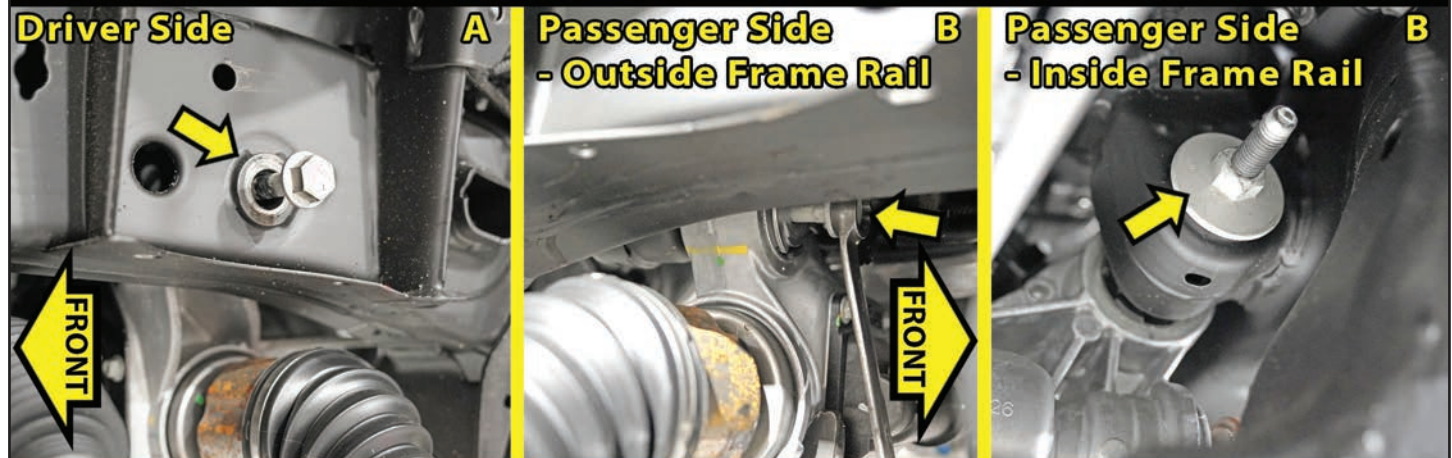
Mark & Disconnect Front Driveshaft... Driver Side
